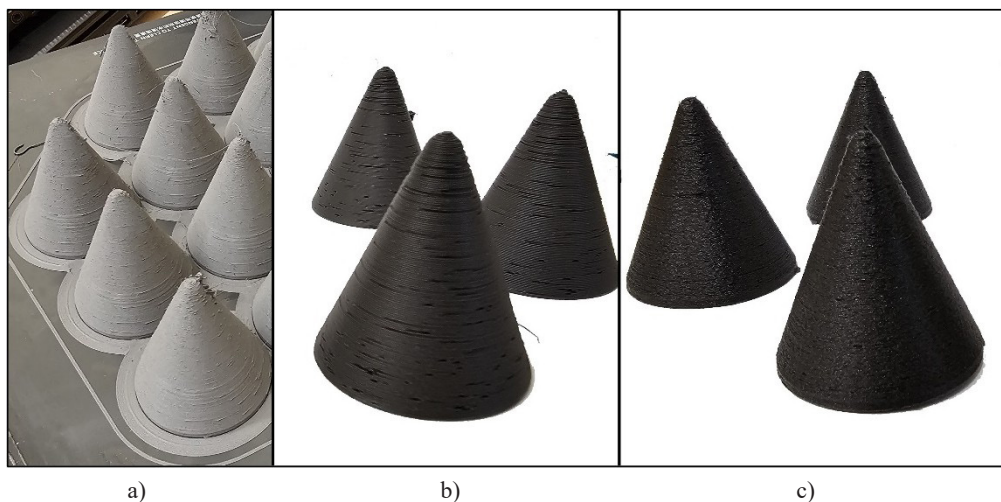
Examples of printouts of liners of shaped charges made of: a – PLA/Steel, b – PETG/W, c – PA12CF15
